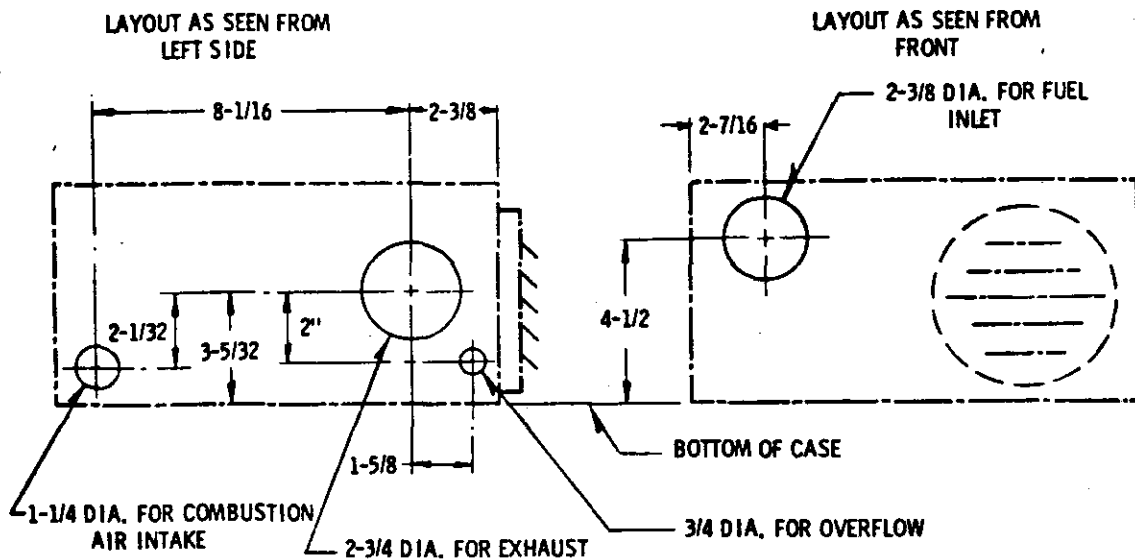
Model UH-47-6 Heater, Mounting Dimensions.
